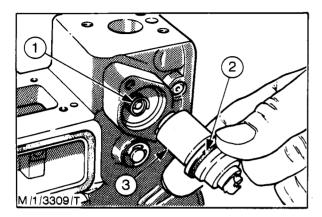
Installing the Excess Fuel Solenoid (Dover)
